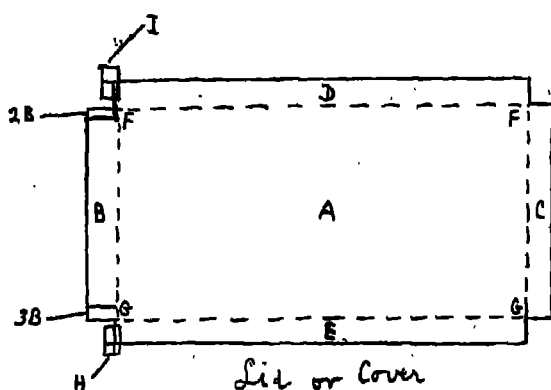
TWO-PIECE PAPER FRILLED SHIRT BOX.
